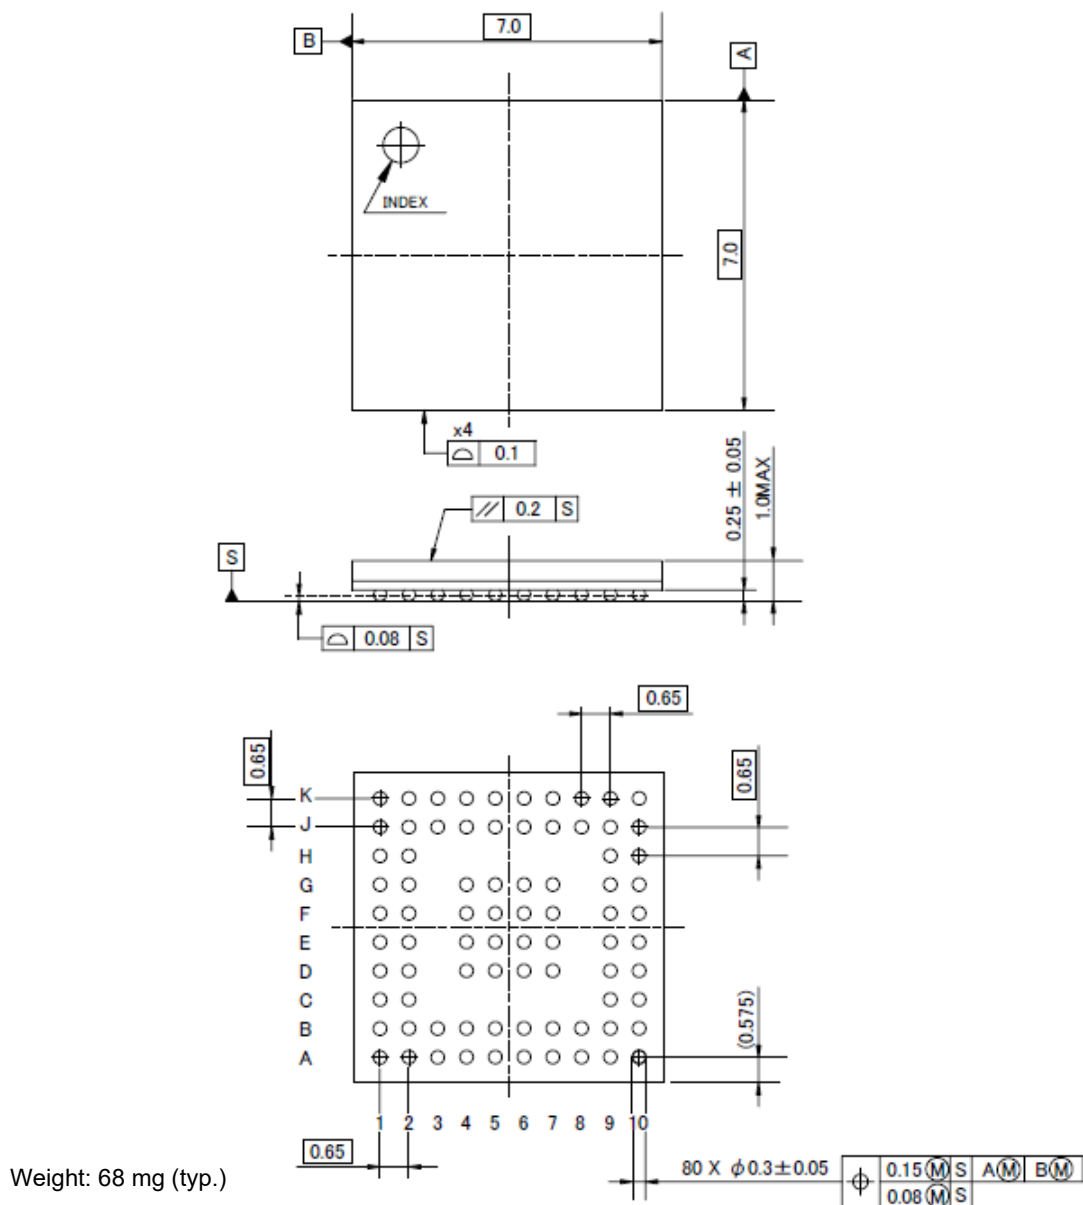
TC358778XBG/TC9594XBG P-VFBGA80-0707-0.65-001 package
